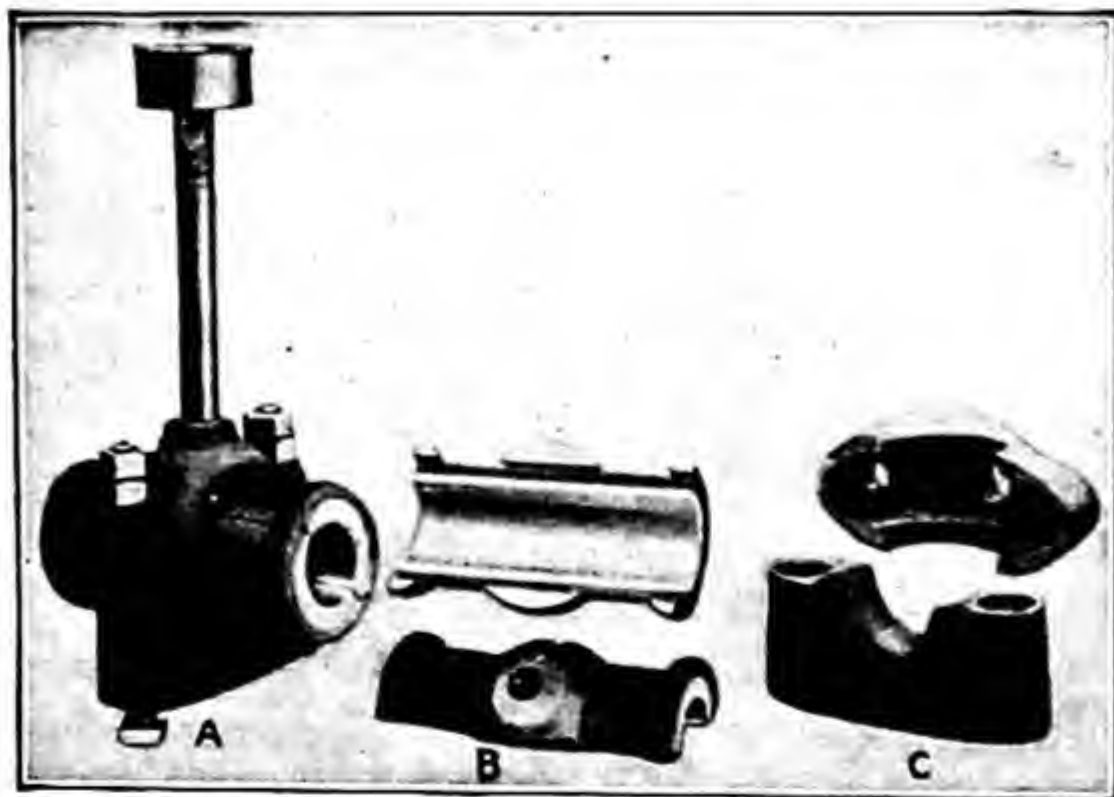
Self-aligning bearing: A, bearing assembled; B, inner unit; C, outer shell or socket.
